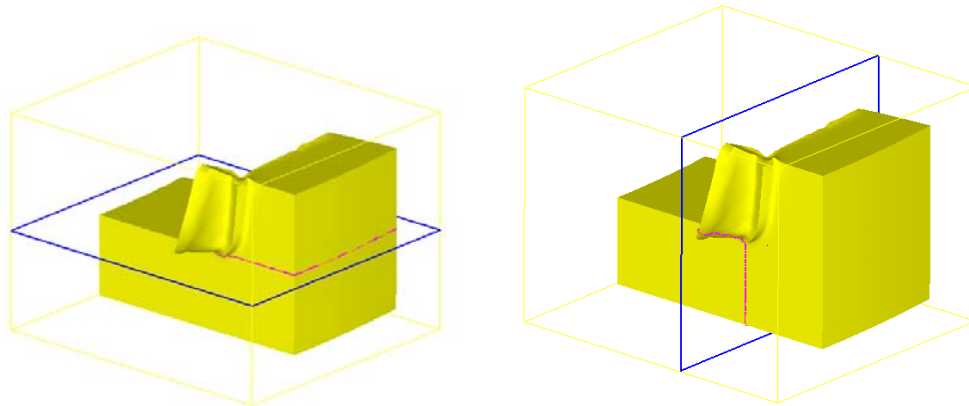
Section planes defined for burr investigation: a horizontal plane on the machined surface (Left) and a vertical plane normal to the machined surface (Right)
